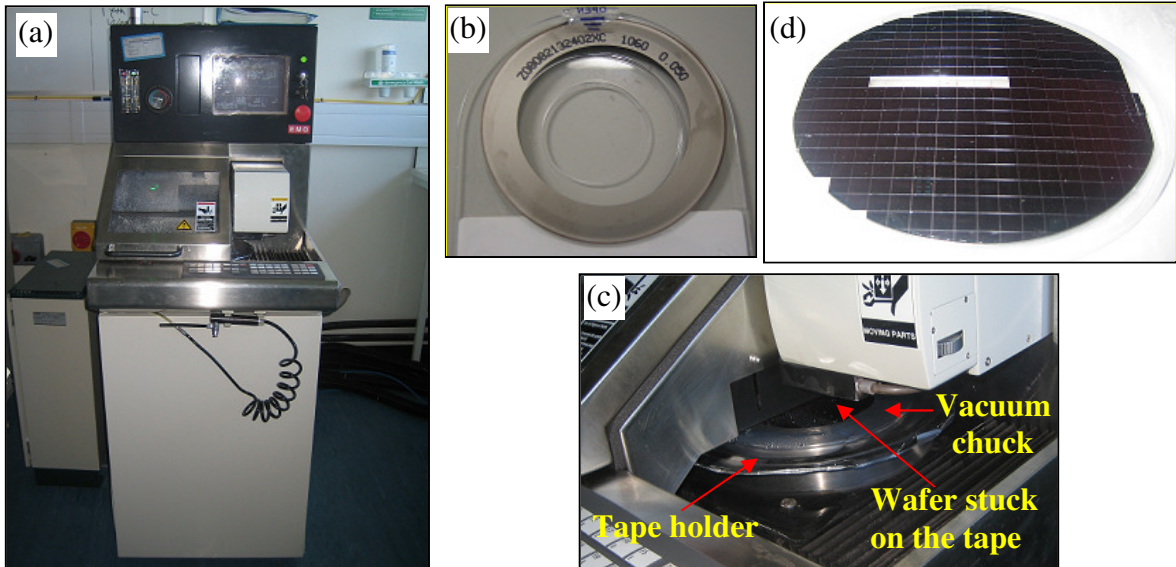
(a) DAD 320 (wafer dicing saw machine); (b) Diamond blade; (c) Wafer stuck on the tape holder and clamped on the vacuum chuck during cutting process; (d) Cut wafer
